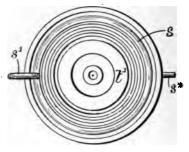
Longuemare liquid fuel burner used in Serpollet boiler. Plan view.
